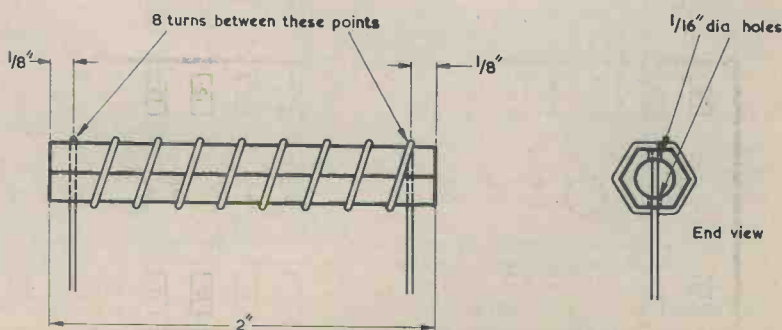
The coil L1 is wound on a section cut from the body of an inexpensive ball-point pen
